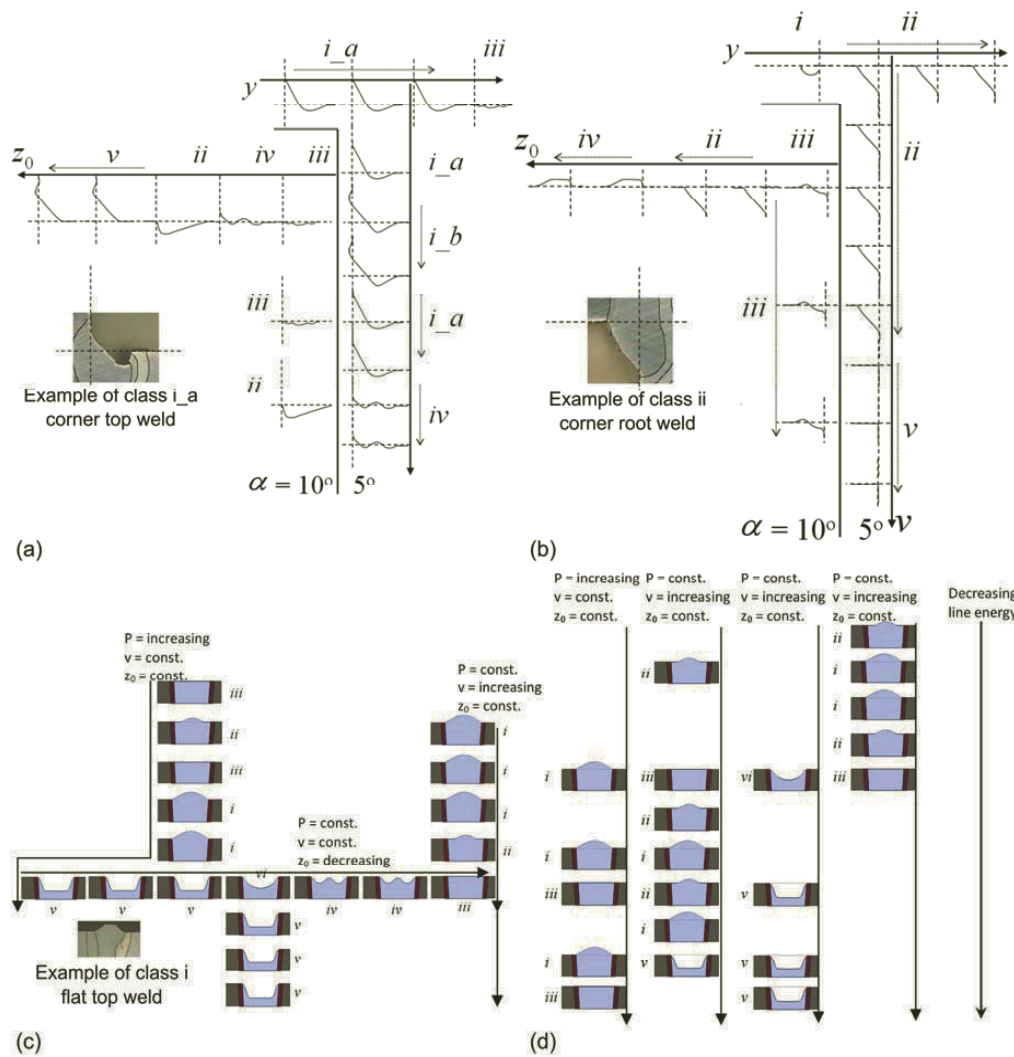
Weld geometry and its class changes along with the welding parameter changes: (a) corner top, (b) corner root, (c), (d) flat top
